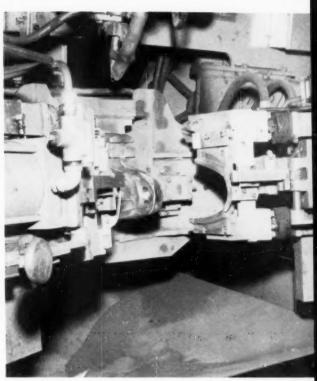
Close-up of one trunnioned fixture for the first automatic arc welding operation on bumper guards as it appears before I o a d i n g over backups of copper alloy and with clamping elements retracted. Below is the hopper that catches unfused flux.
